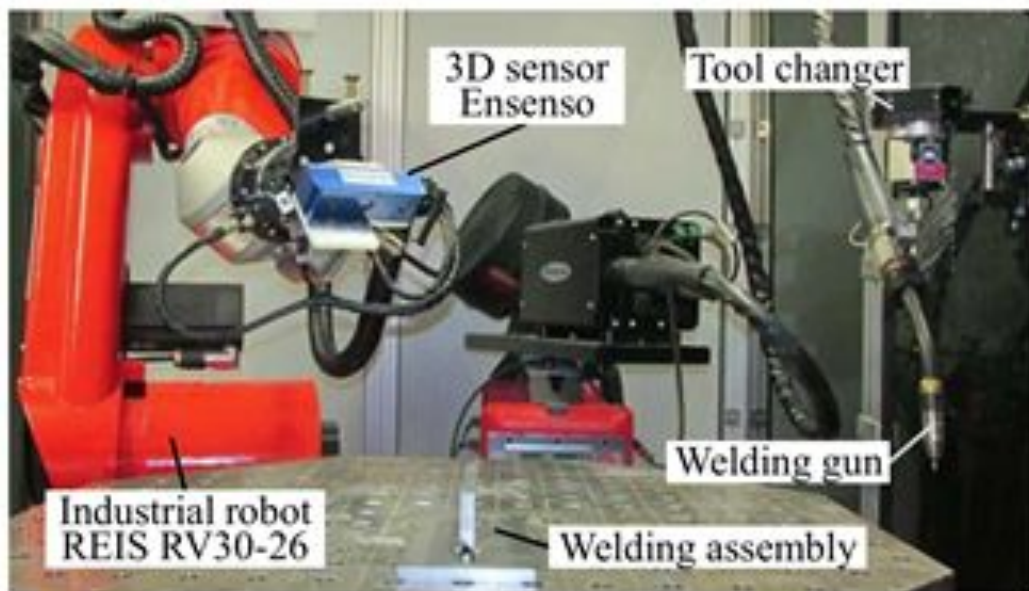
Setup of robotic welding system at Fraunhofer IPA.
